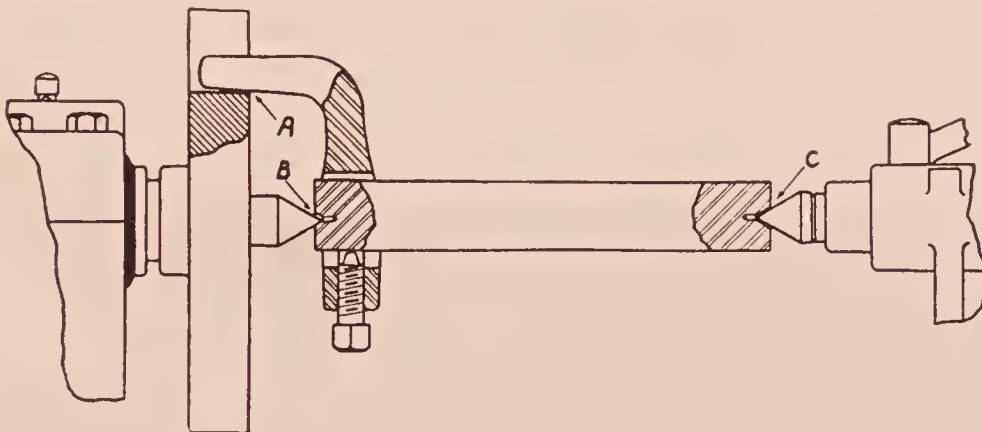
Using partial sections of parts in an assembly drawing. From the South Bend Lathe Book.
